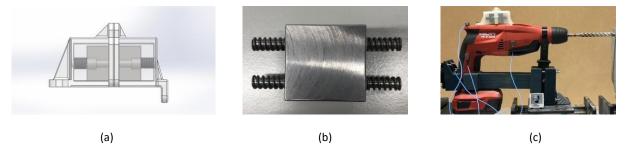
(a) CAD model of the TMD (b) components of the TMD showing the cuboid mass, shafts and compression springs, and (c) deployment of the TMD on the hammer drill
